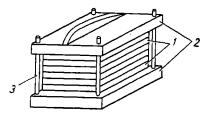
Arrangement of plates in thermal straightening: 1-plates; 2-clamps: 3-bracing bolts
